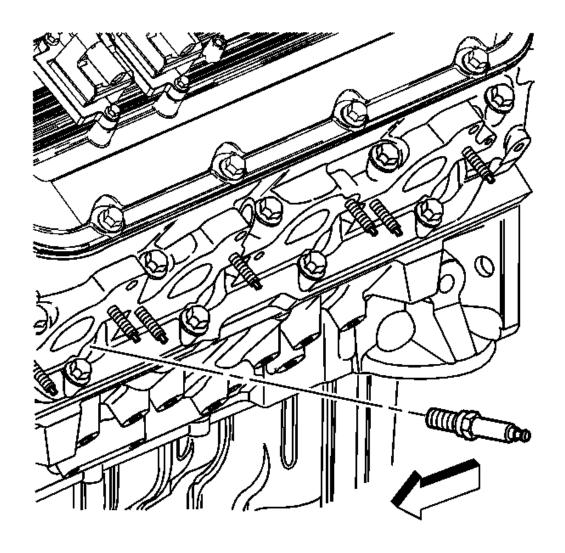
View Of Spark Plugs Courtesy of GENERAL MOTORS CORP.
